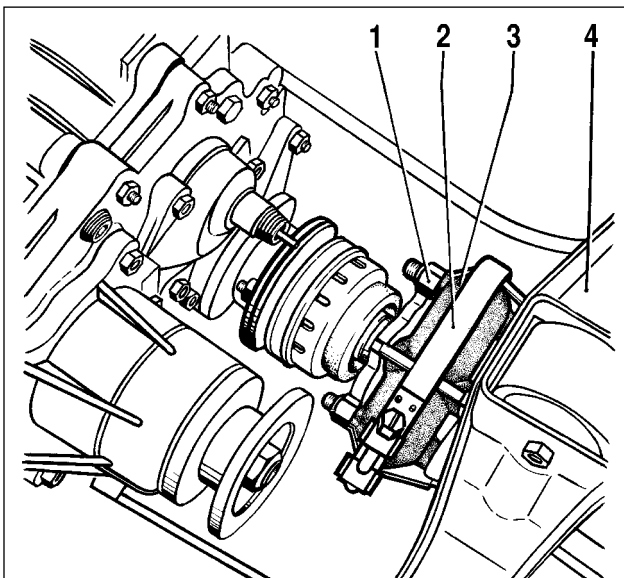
Flexible coupling between the propeller shaft and the gearbox:
